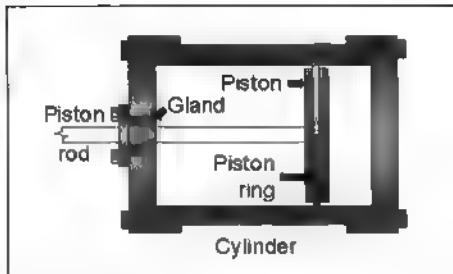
Cross-section through a steam-engine cylinder and piston fitted with a cast-iron piston ring.
